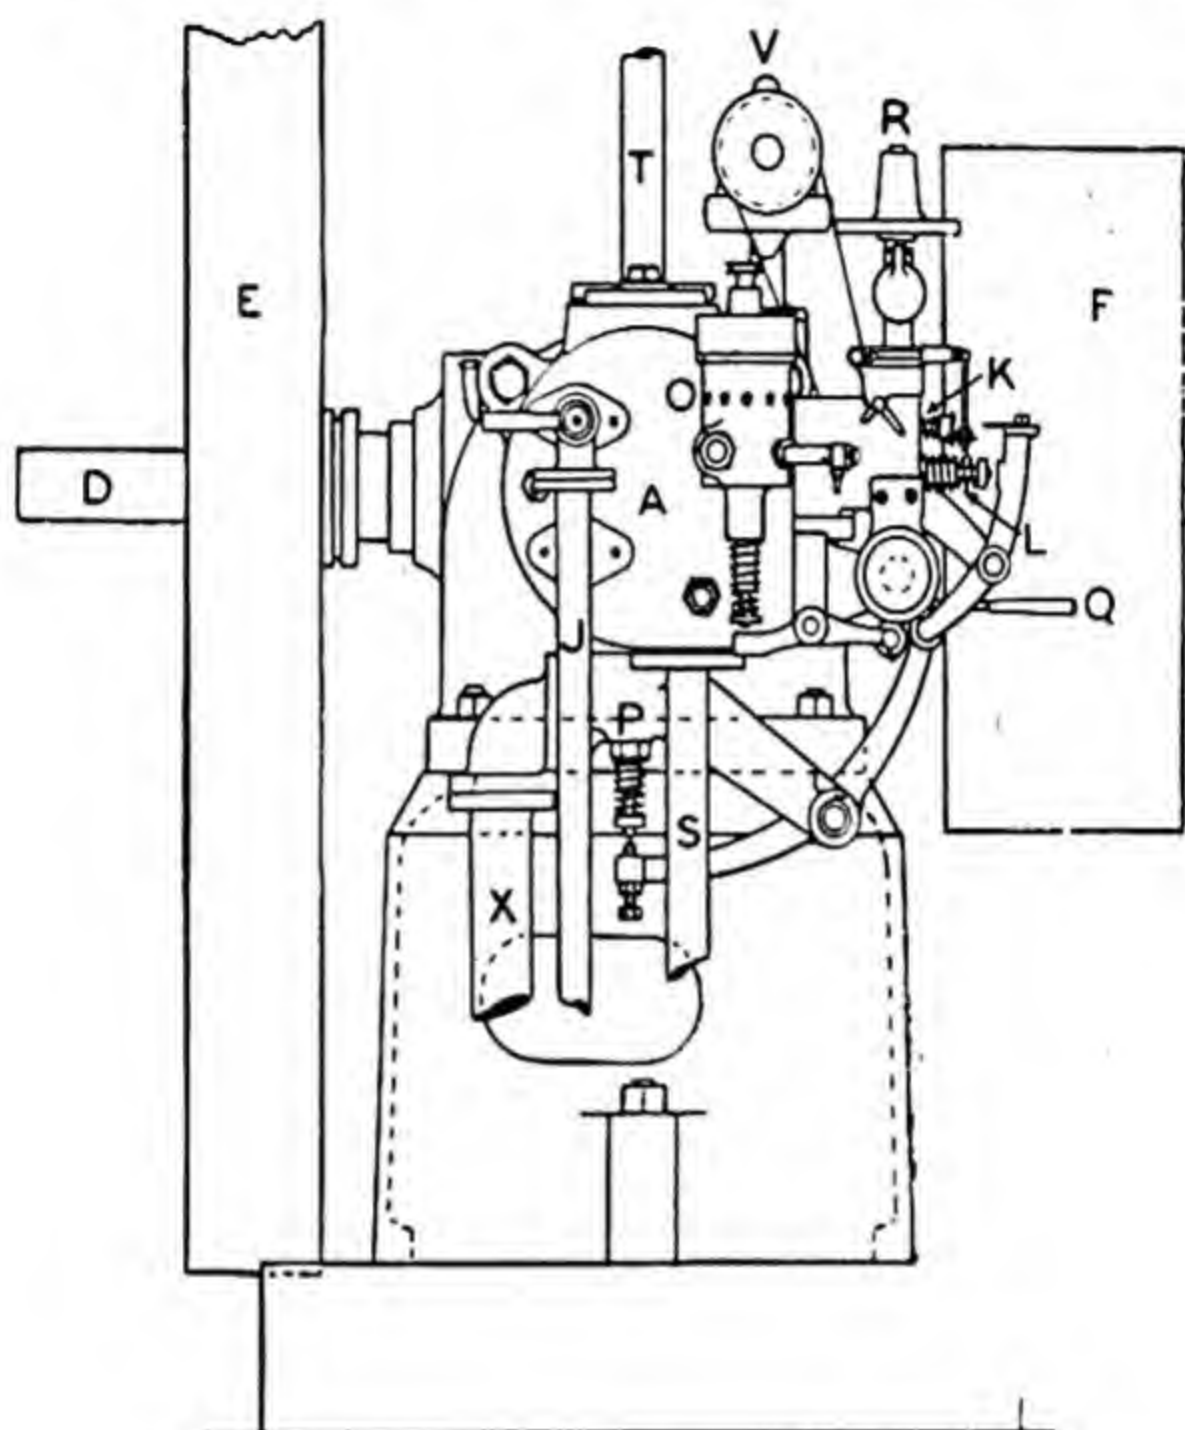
End elevation of 6½ B.H.P. Crossley gas engine.
